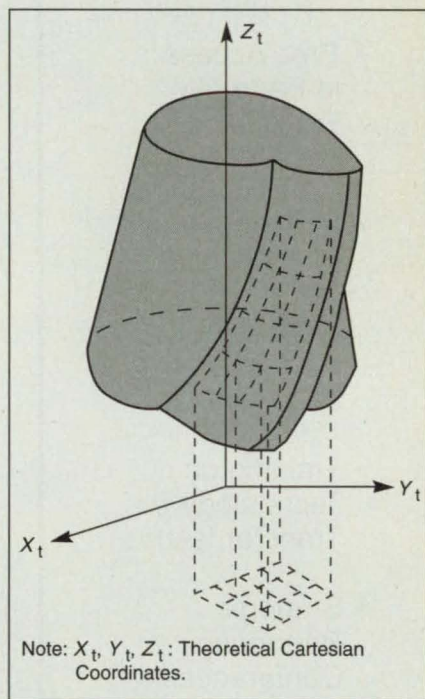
The Measurement Grid on the Surface of the gear tooth is defined by nominal contact points on the theoretical tooth surface.
